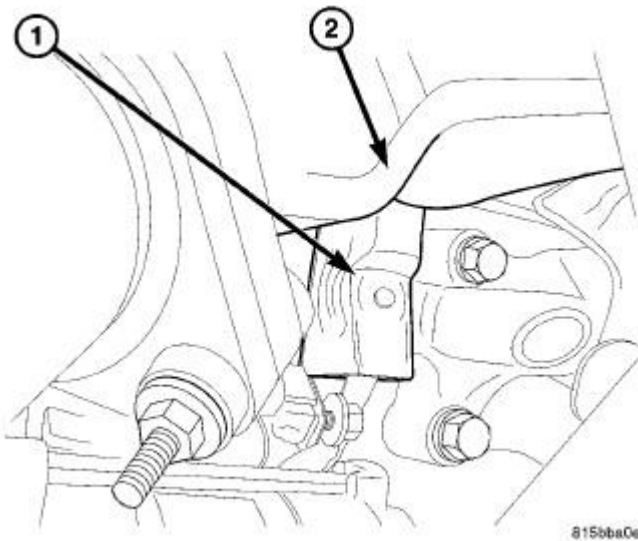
KNOCK SENSOR HEAT SHIELD - 6.1L
